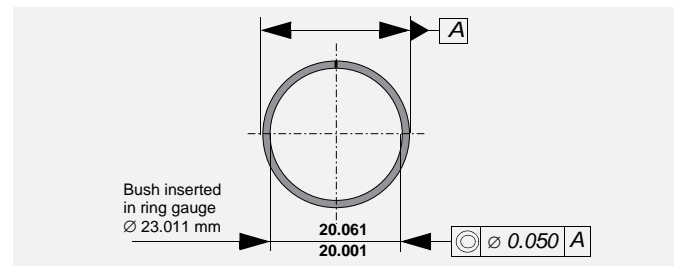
Test C, Data for drawing (example $D_i = 20$ mm)
